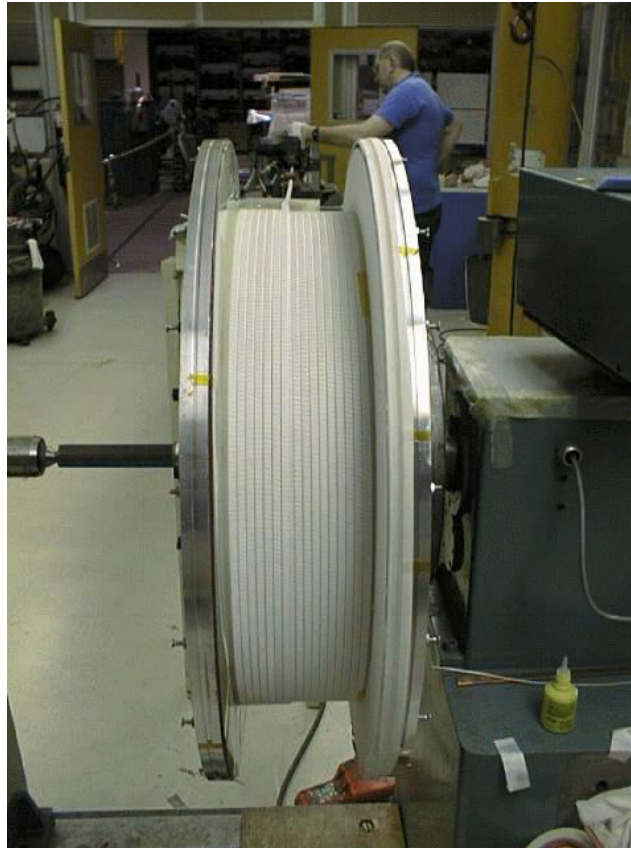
Winding of the LDX Floating Coil. Very similar to winding the MECO TS coils. The winding mandrel becomes part of the TS structure.
